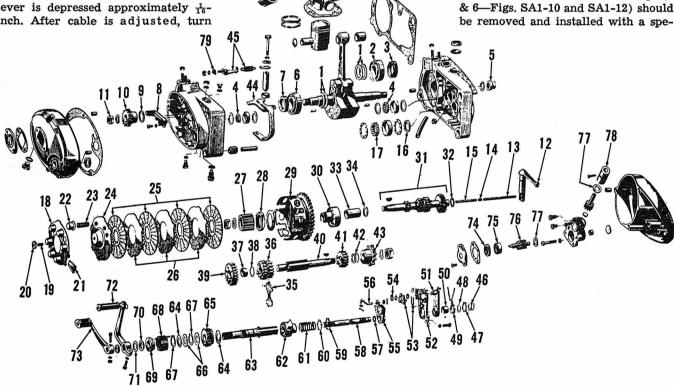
Exploded view of the K-103 engine and transmission assembly.
